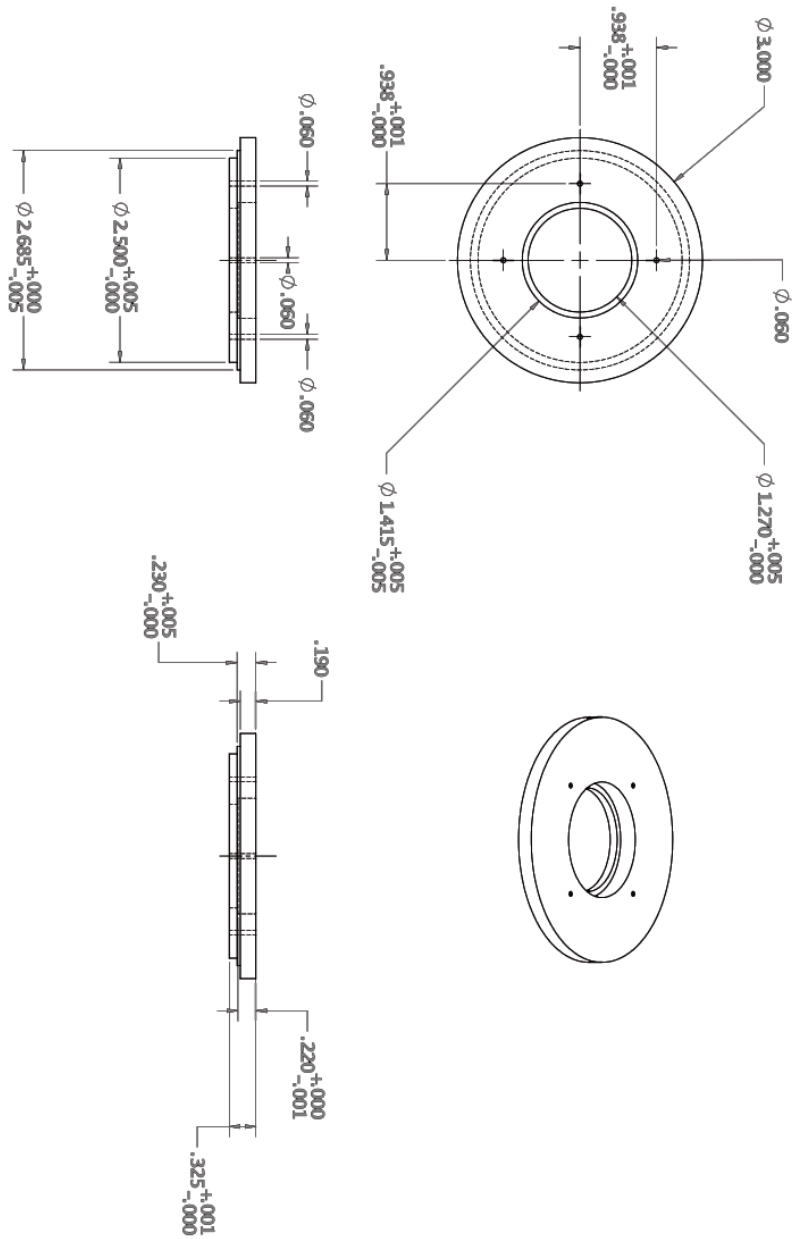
Drawing of the top/bottom iris along with tolerances on each surface. All dimensions are in inches.
